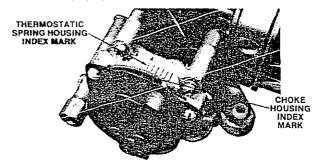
AUTOMATIC CHOKE THERMOSTATIC SPRING HOUSING ADJUSTMENT
